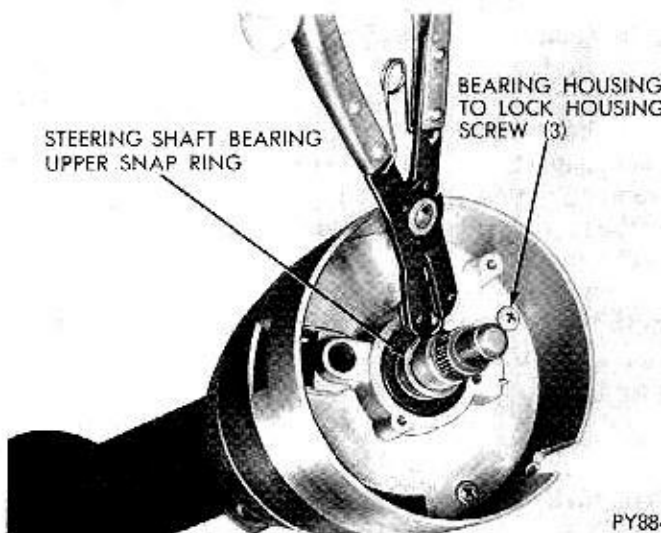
Steering Shaft Bearing Upper Snap Ring
